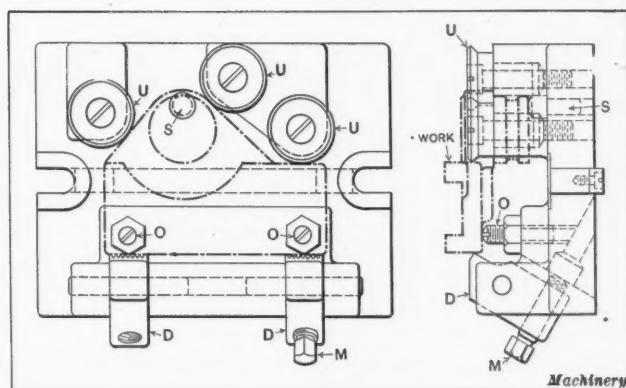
Fixture employing Standard Details, Similar to that shown in Fig. 8
